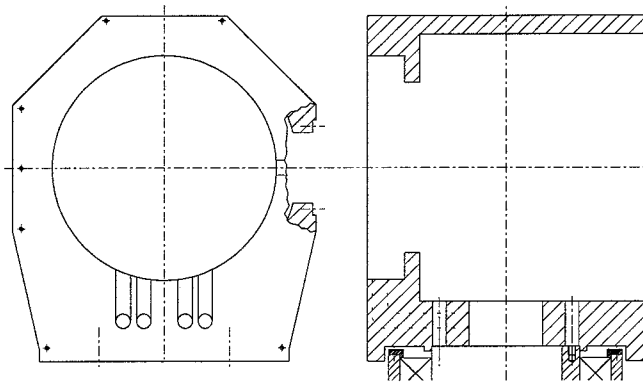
Step 6 and 7: mounting Housing DM30 (10.)
